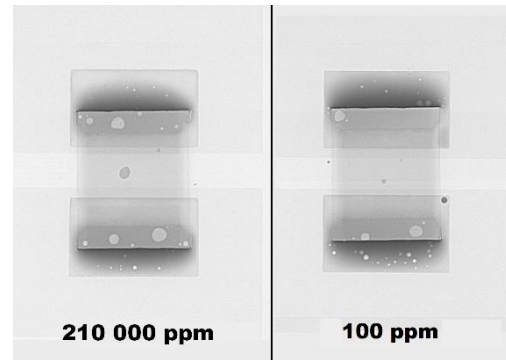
X-Ray inspected SMD's soldered in different nitrogen atmosphere
